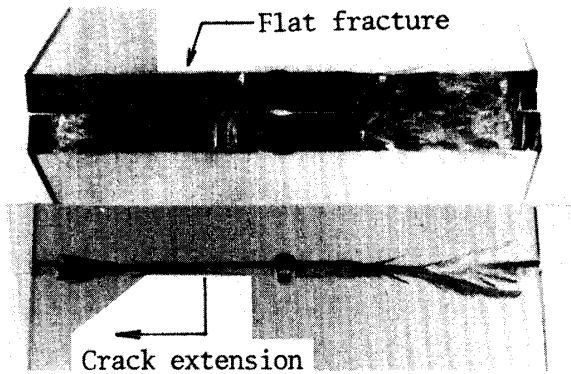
An example of fracture surface of the hard polyvinyl chloride, the cracks initiated at both tips of center crack.
